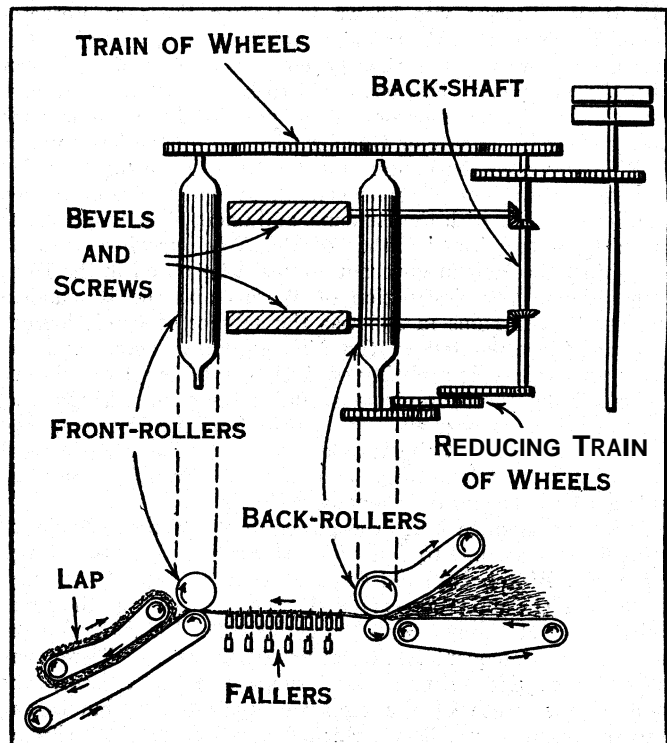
PLAN AND SECTION OF A PREPARING BOX
